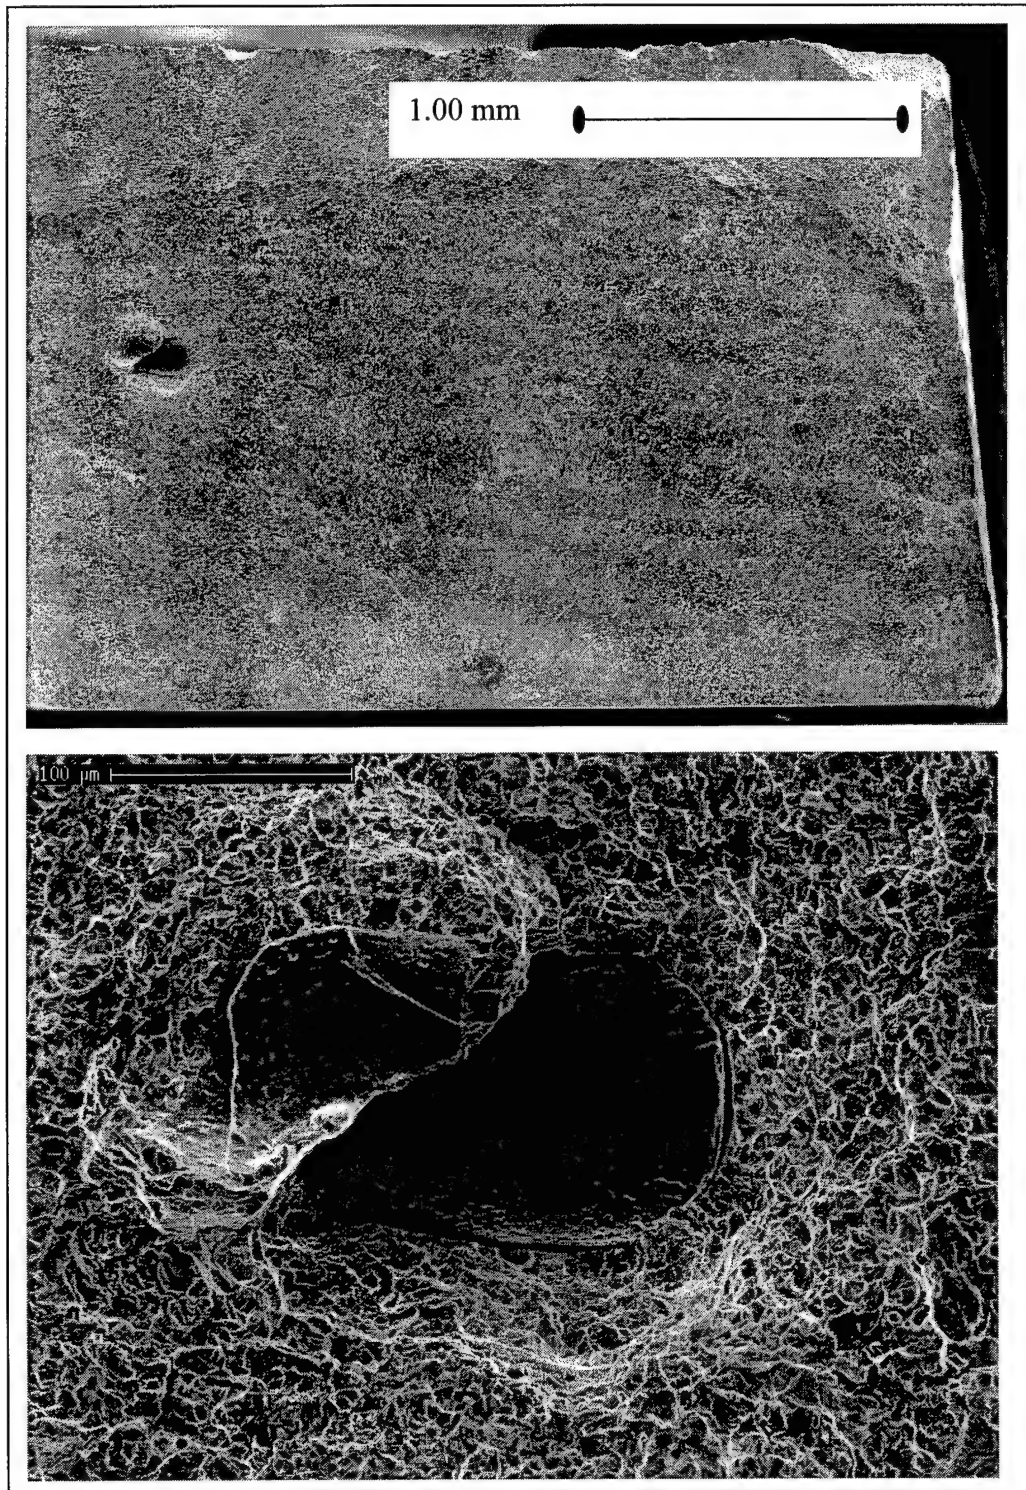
Specimen A3 (4:1 taper) – complete view of the fracture surface and close-up view of the fiber shard on fracture surface
